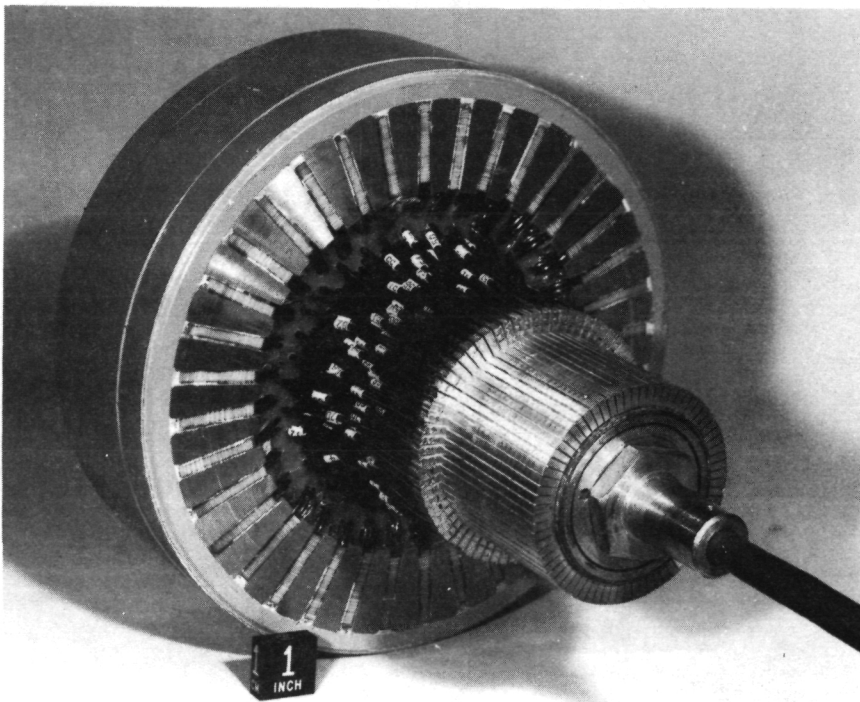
Engineering Model Rotor Assembly - Commutator End
